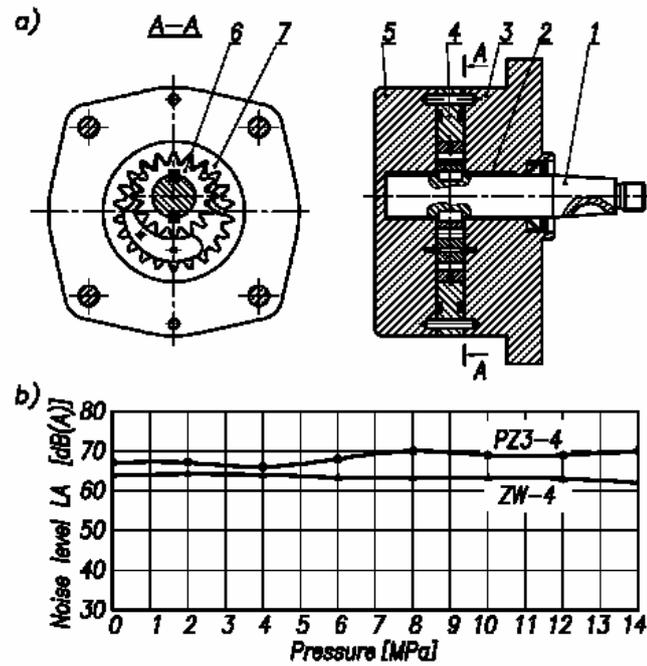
Gear pump ZW-4 featuring internal involute gearing:
